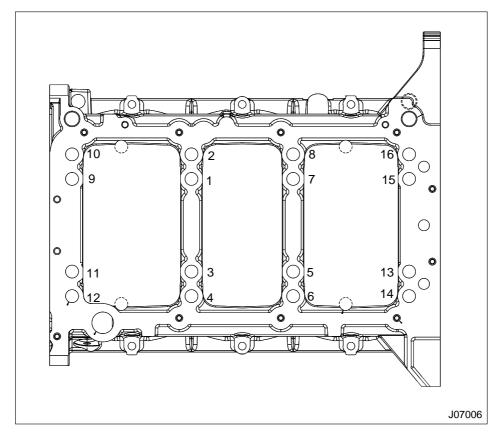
Lower crankcase main bearing mounting bolt tightening sequence
